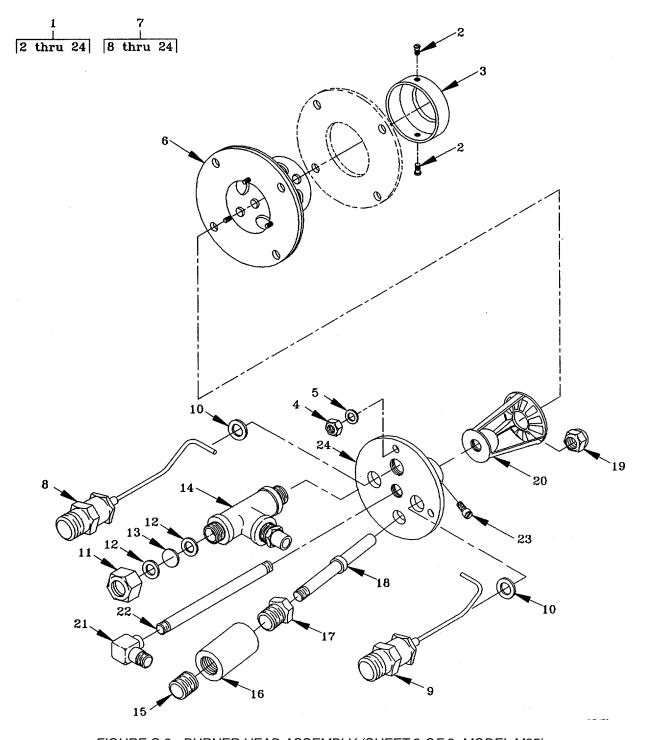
BURNER HEAD ASSEMBLY (SHEET 2 OF 2, MODEL M85)
